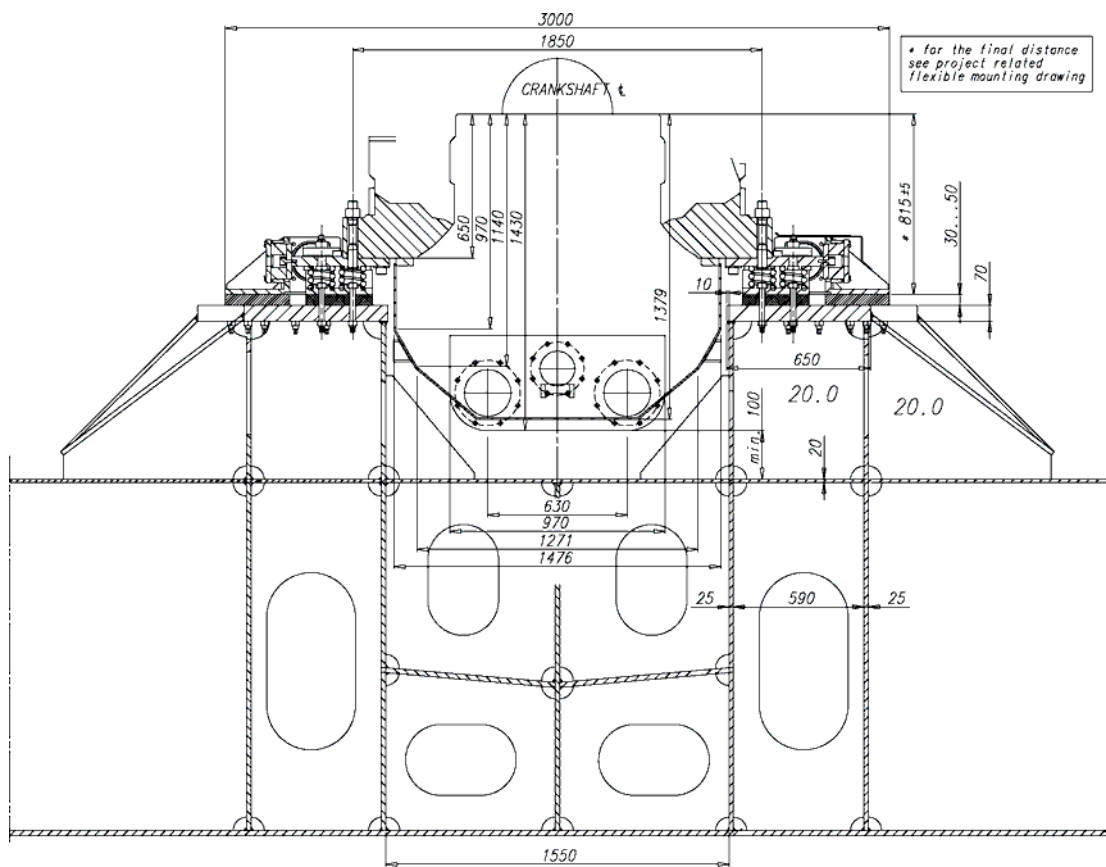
Seating and fastening, resiliently mounted in-line engine (DAAE029031 A)
